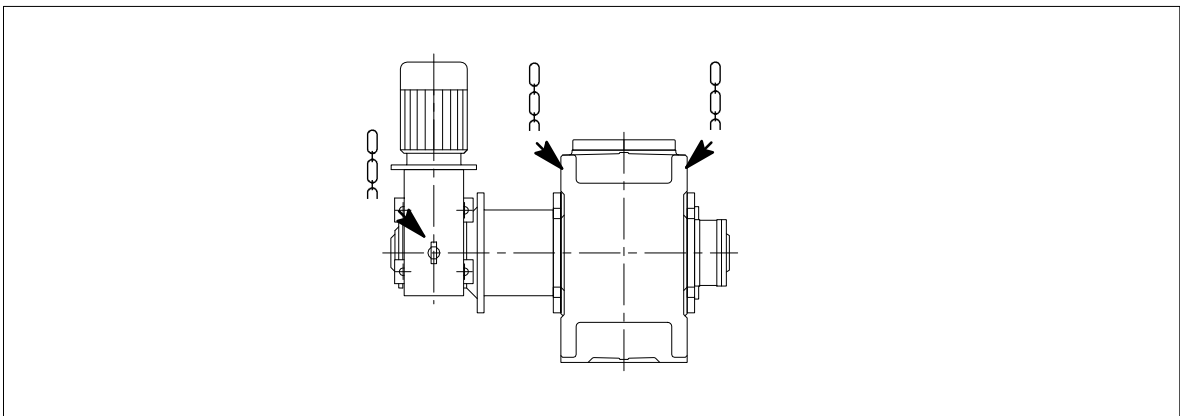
Attachment points on gear units of type B3.H with auxiliary drive
